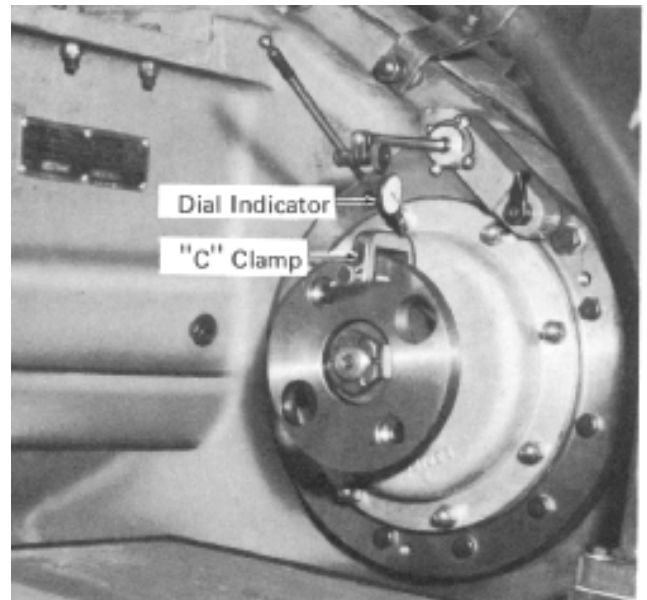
Checking Auxiliary Drive Gear Backlash
